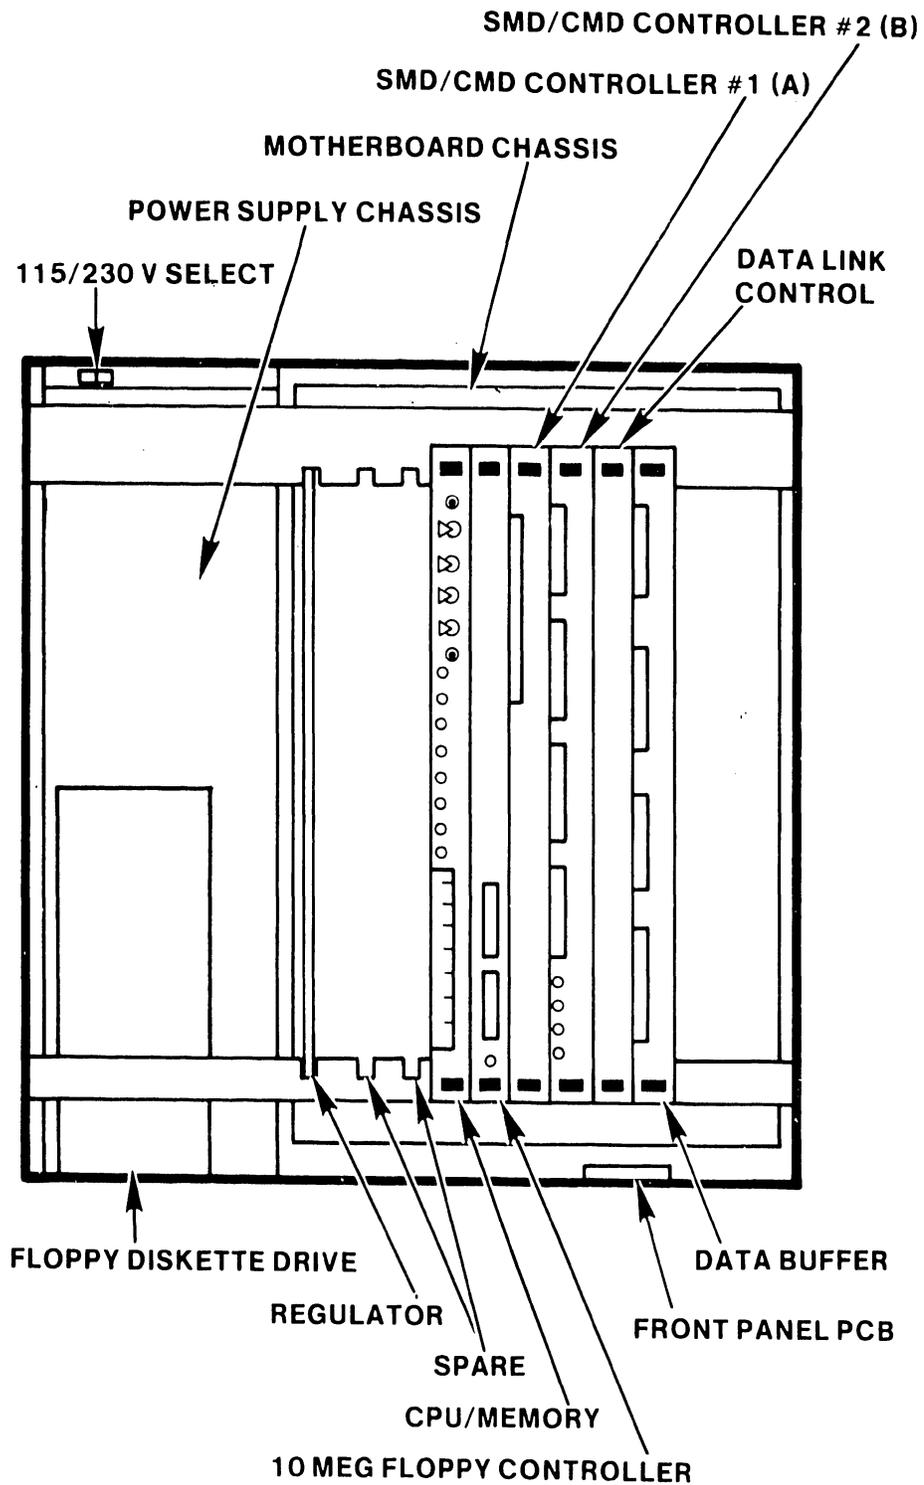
MASTER UNIT MAJOR COMPONENT LOCATIONS
